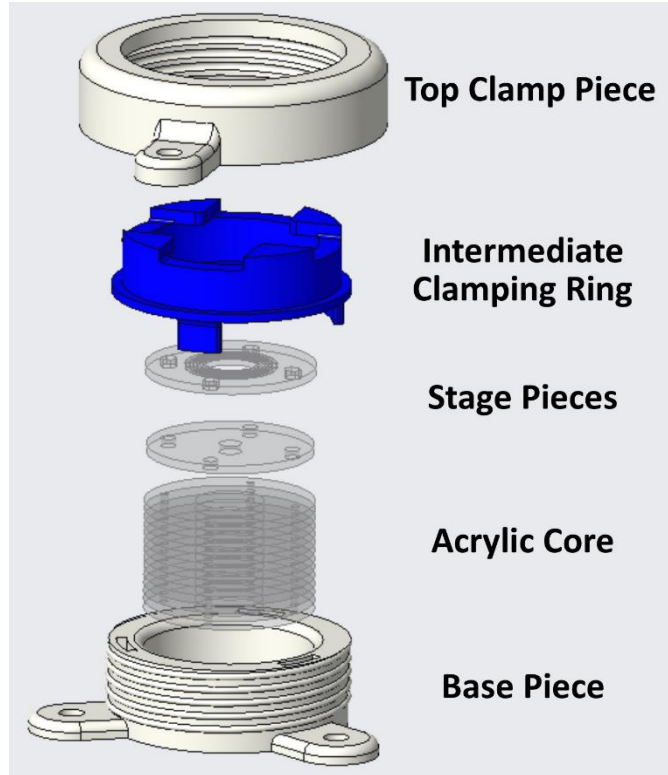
Expanded assembly view of components of the top loaded clamp frame.
